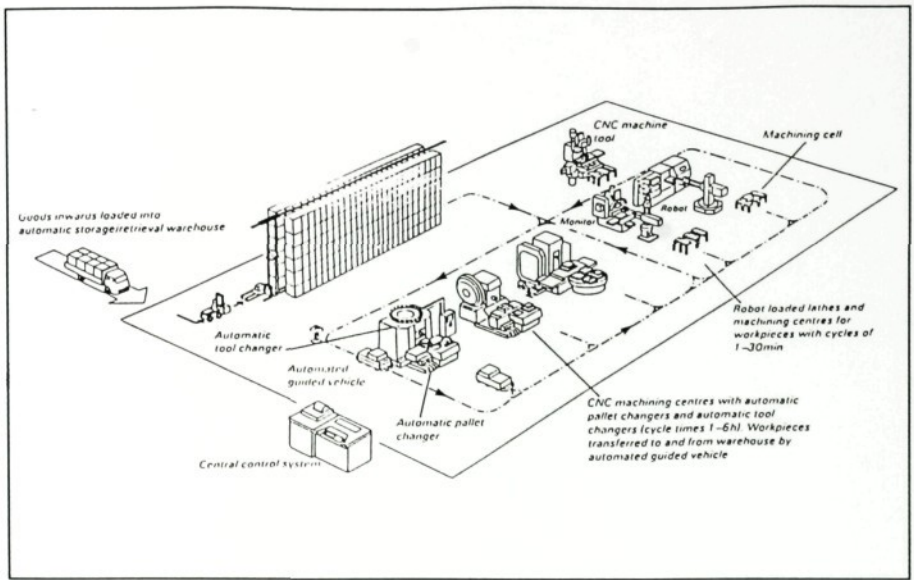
The principle of FMS: Machines can work on variety of components unmanned, with automated tool and workpiece changing. Delivery of workpieces by unmanned trolley
